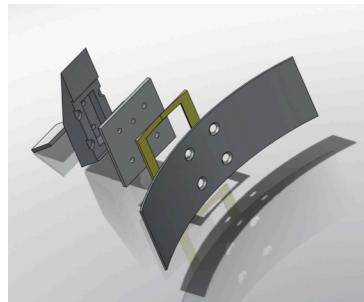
MIRROR MOUNT CAD MODEL BACK VIEW
